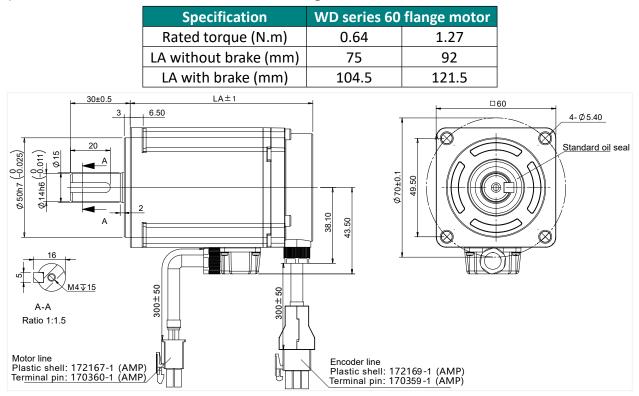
Installation dimension of WD series 60 flange servo motor
